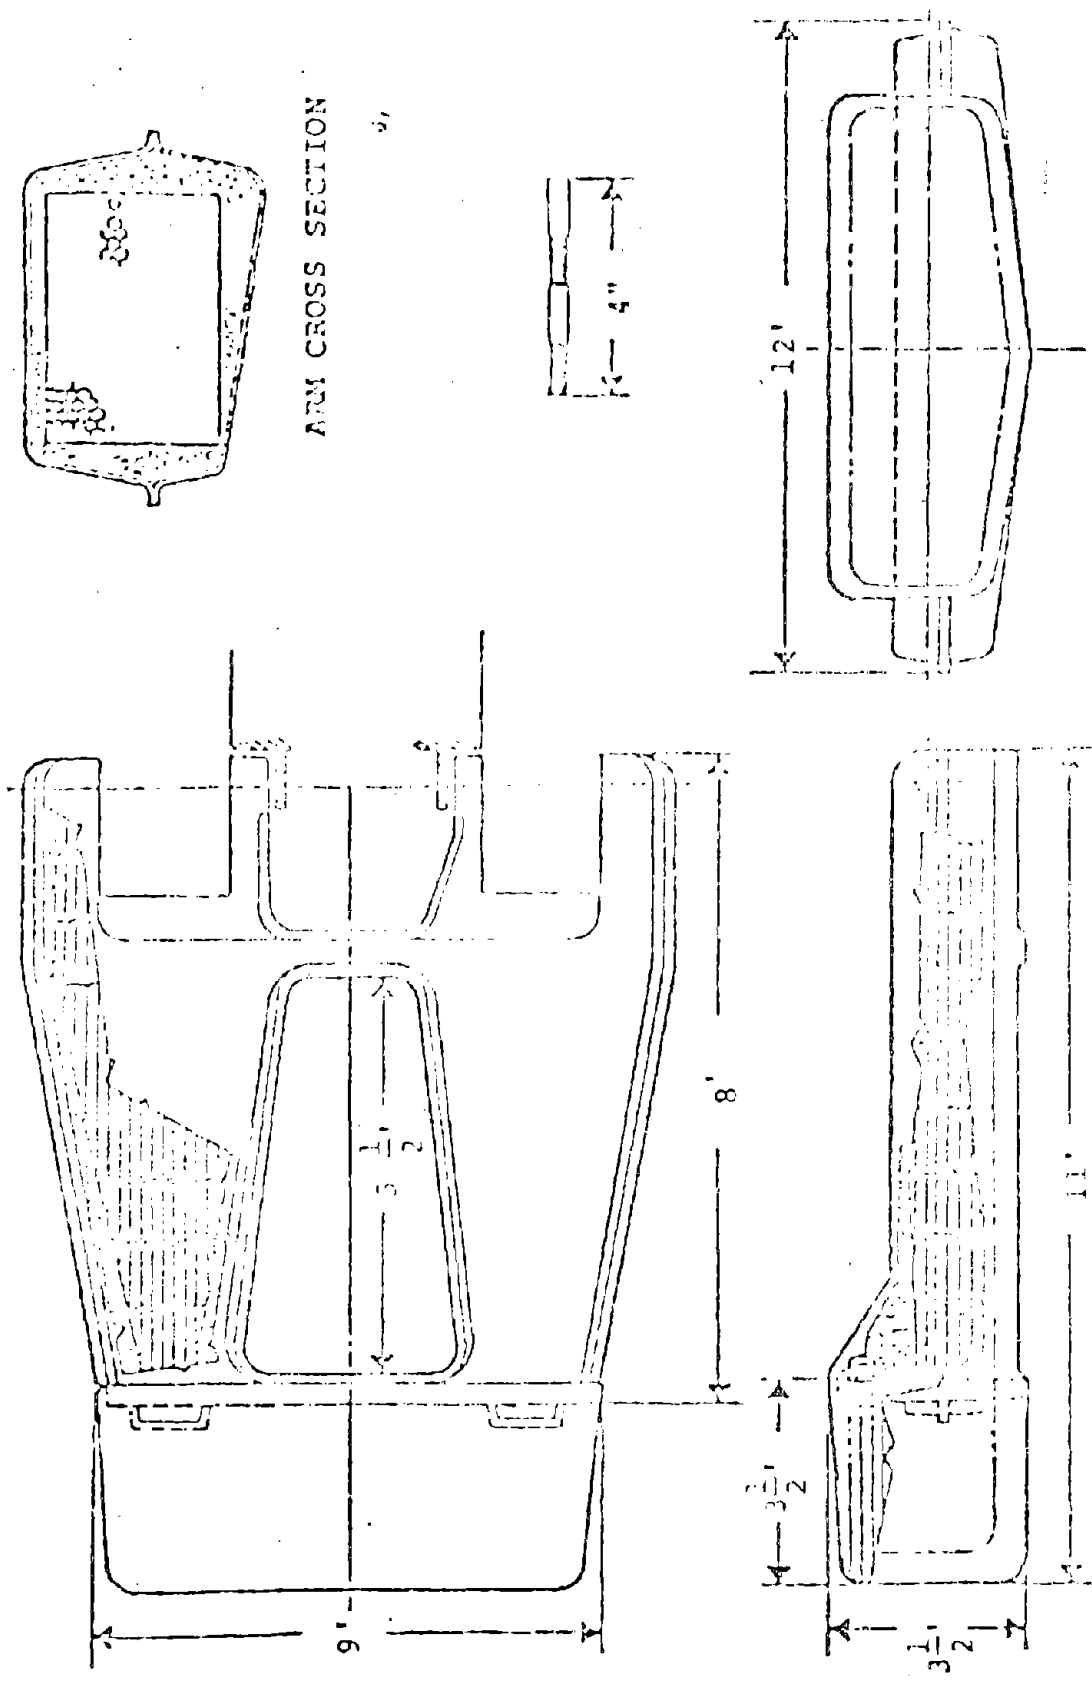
BASIC DIMENSIONS OF CAD DESIGN CONCEPT
